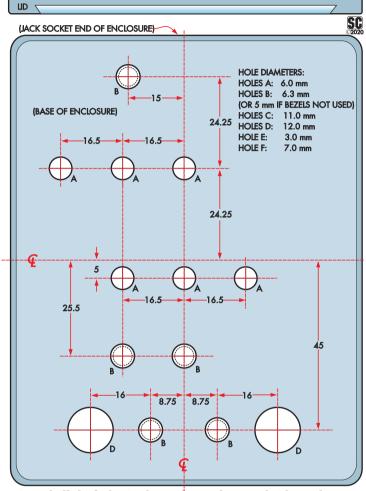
drill the holes in the enclosure base and side as shown. Two of the holes in the side need to be slotted so that the sockets can slide down into place. The only hole required in the lid is optional, to access VR4; use the PCB to locate this hole if you've decided to drill it.
